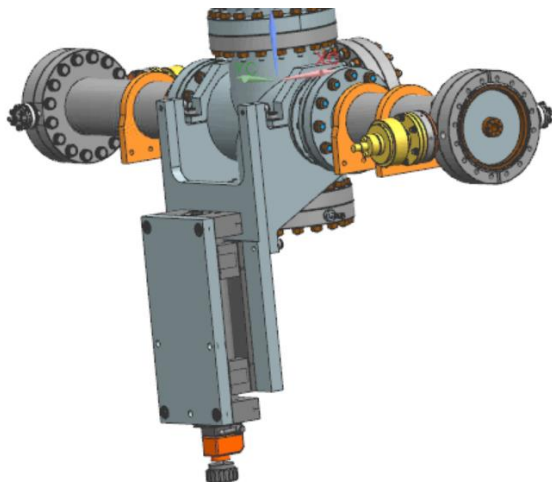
(above): Test Cavity Assembly mounted on the test stand mounting mechanism
